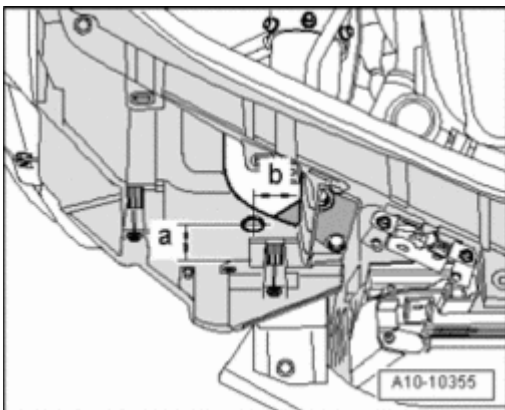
Marking Holes According To Dimensions At Lock Carrier
